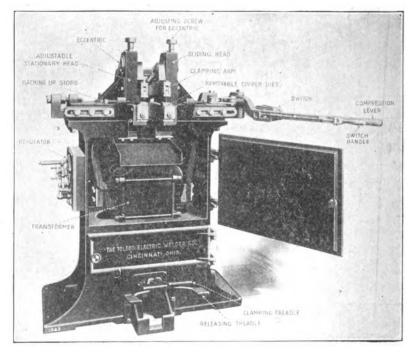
Double Treactle Butt Welder Courtesy of Toledo Electric Welder Company
